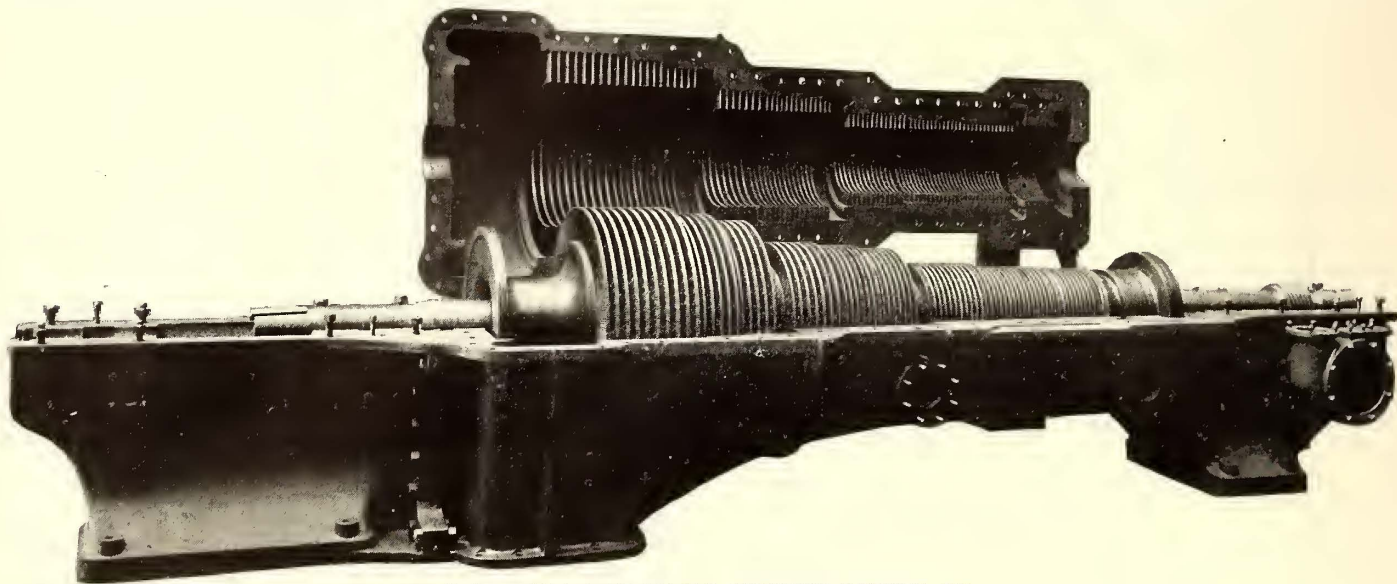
VIEW OF 5000-KW TURBINE OPENED UP
